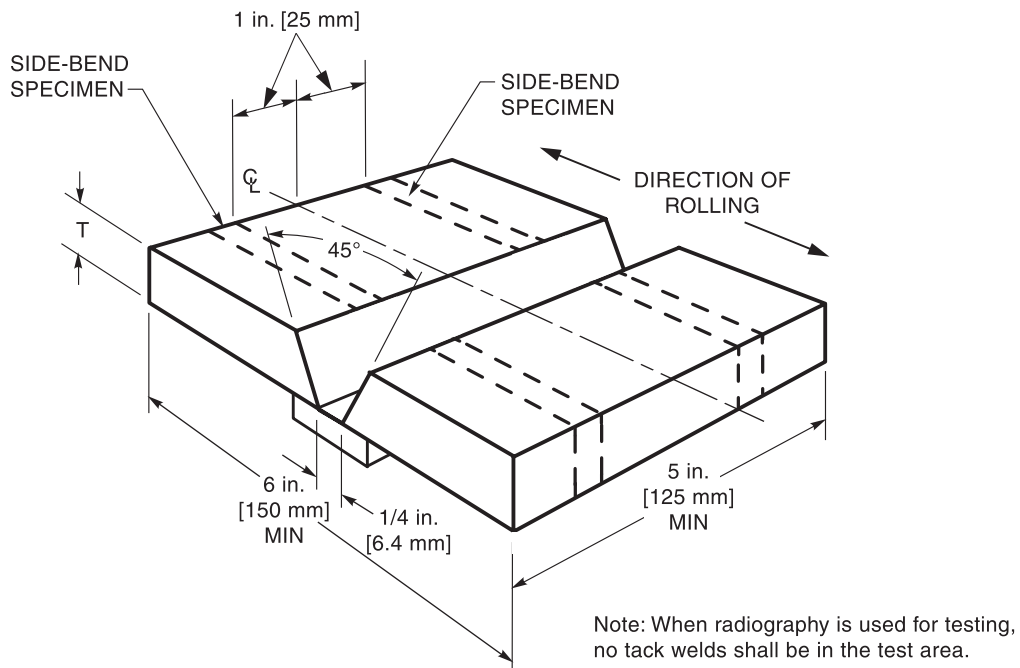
A—Test Plate for Unlimited Thickness—Welder Qualification
